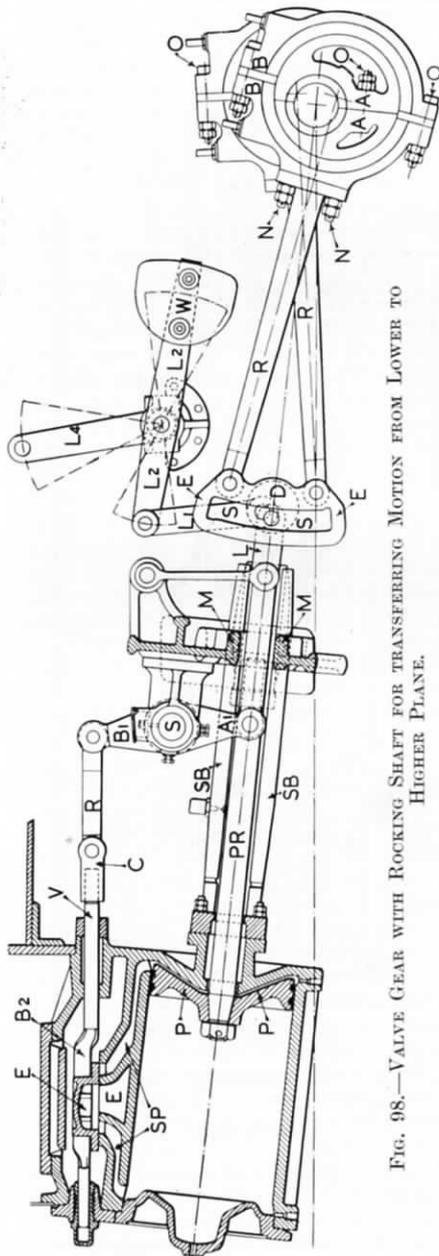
VALVE GEAR WITH ROCKING SHAFT FOR TRANSFERRING MOTION FROM LOWER TO HIGHER PLANE.
